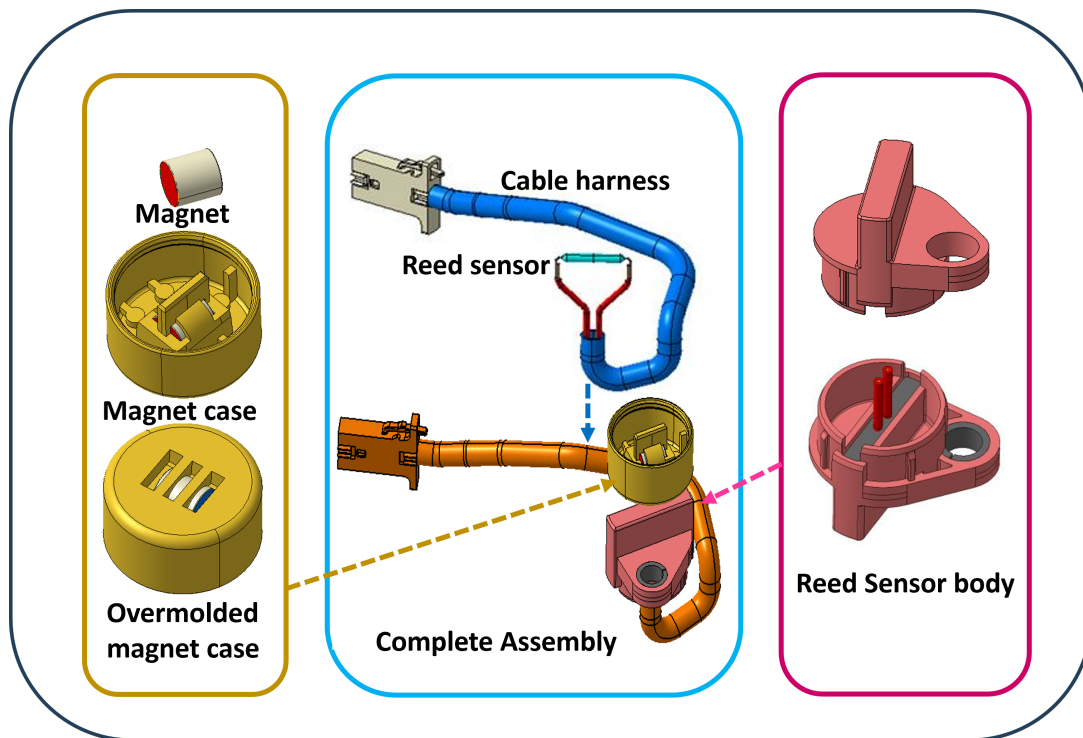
Fully assembled spring-integrated reed-sensor prototype designed for EV applications, showing the compact PBT housing and protected internal components.
